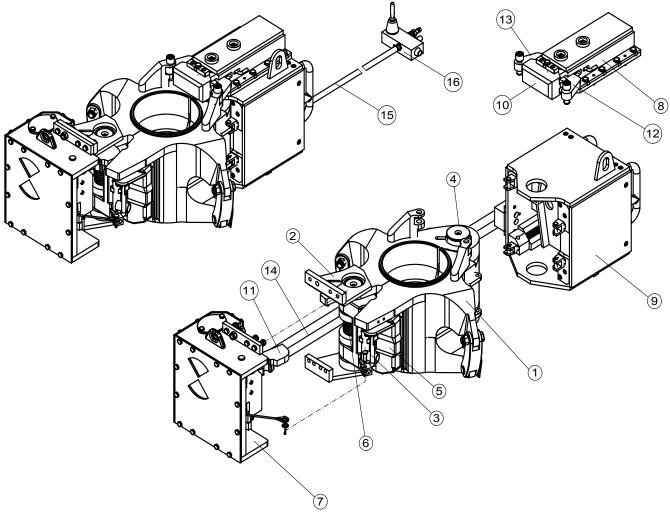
613970-Y-BC ACL-350 / 615970-Y-BC ACL-500 Exploded view
